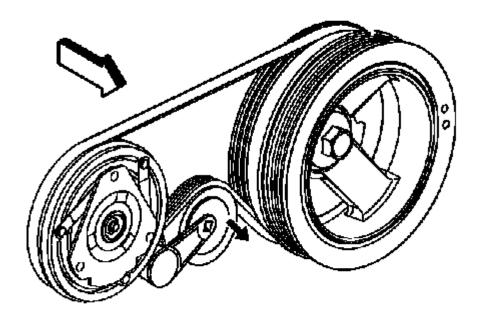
View Of A/C Drive Belt Routing Courtesy of GENERAL MOTORS CORP.
